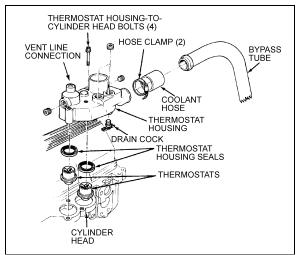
THERMOSTAT AND RELATED PARTS 05034
